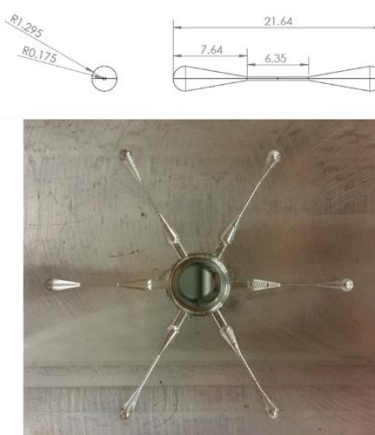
CAD drawing of the 2D, sacrificial filament templates with associated CNC-milled aluminum mold. All dimensions in millimeters.
